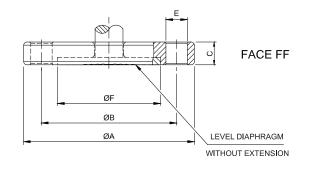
(c) – Dimensional Drawing and Mounting Position for LD291 – Sanitary
